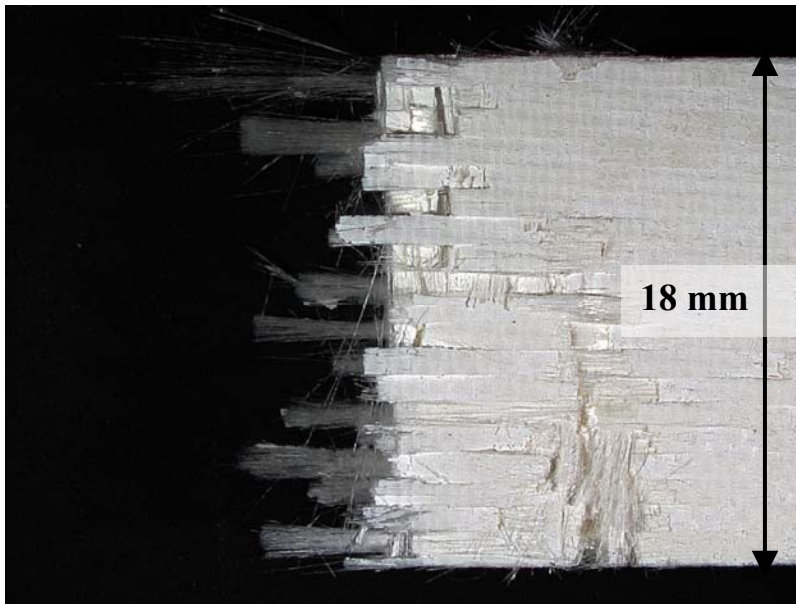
Fracture surface of N720/A specimen tested in compressive creep at -100 MPa for 100 h at 1200°C in steam.
